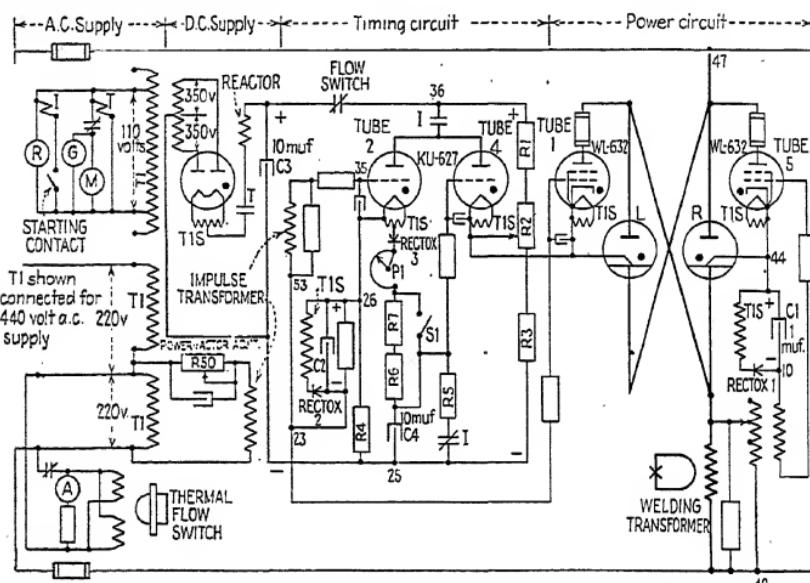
F.—Westinghouse synchronous spot-welding control (Type SP-11).
